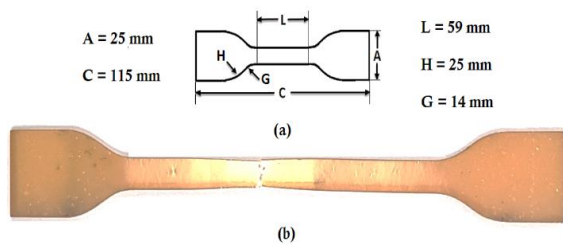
(a) Schematic of tensile specimen and (b) tensile specimen after tensile test
